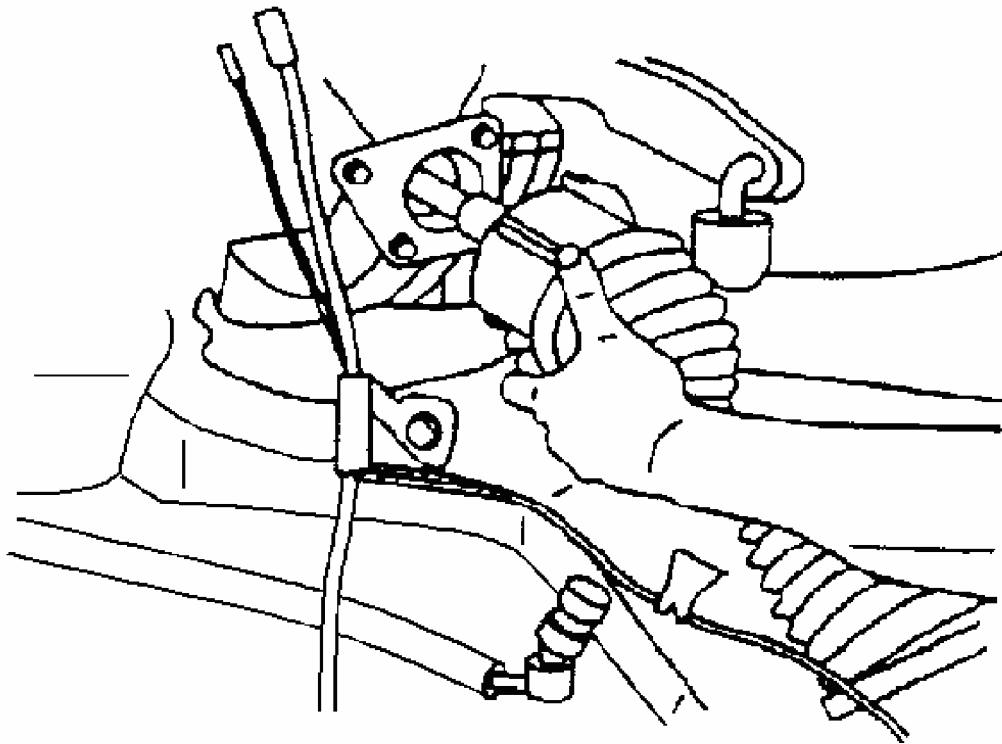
View Of Wheel Drive Shaft To Differential Carrier
